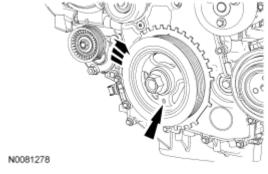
Identifying Hole In Crankshaft Pulley In 6 O'Clock Position Courtesy of FORD MOTOR CO.
